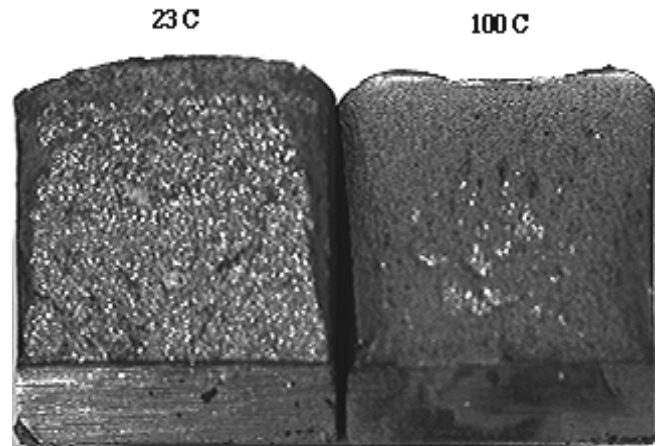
, Charpy fracture surfaces, 1045 hot rolled steel at 23°C and 100°C
